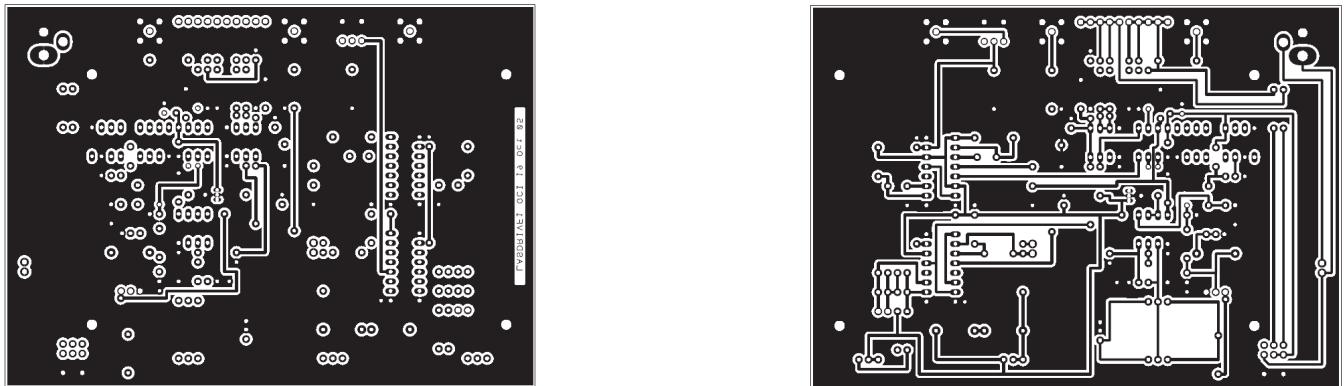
The upper, component (left) and lower track (right) printed circuit board layouts, scale 2:1.
